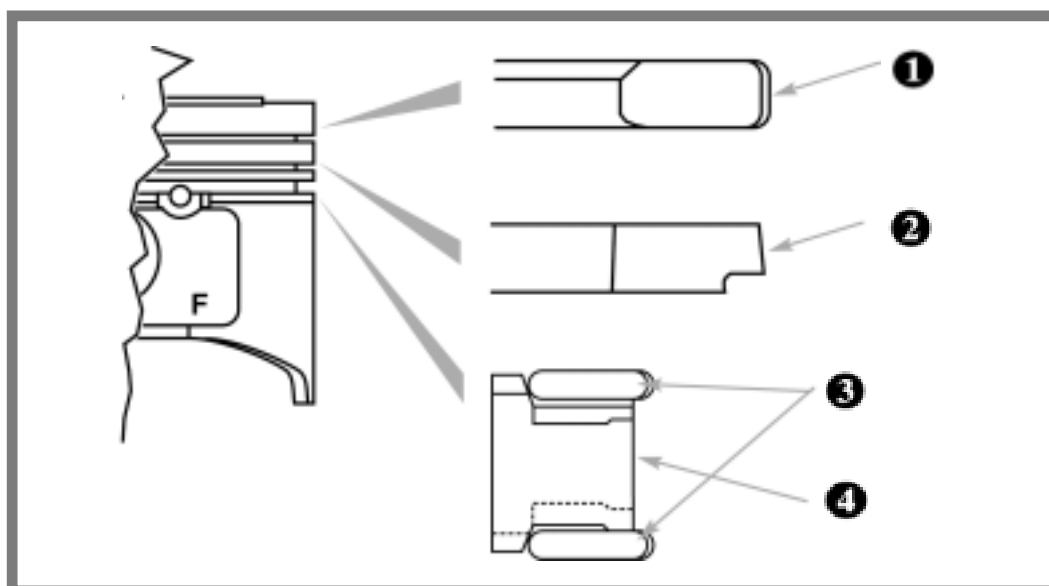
A typical piston has two compression rings on top and an oil ring on the bottom.
